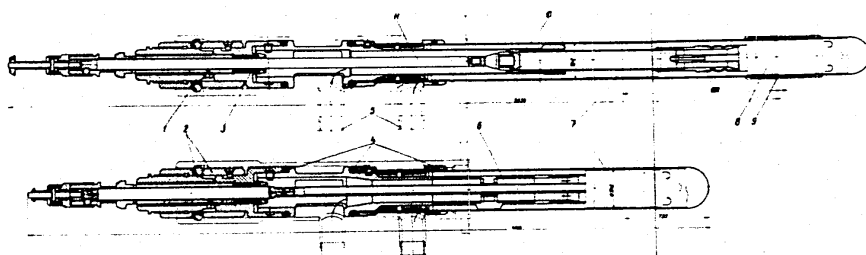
Fuel channels with mobile and fixed fuel assemblies.
